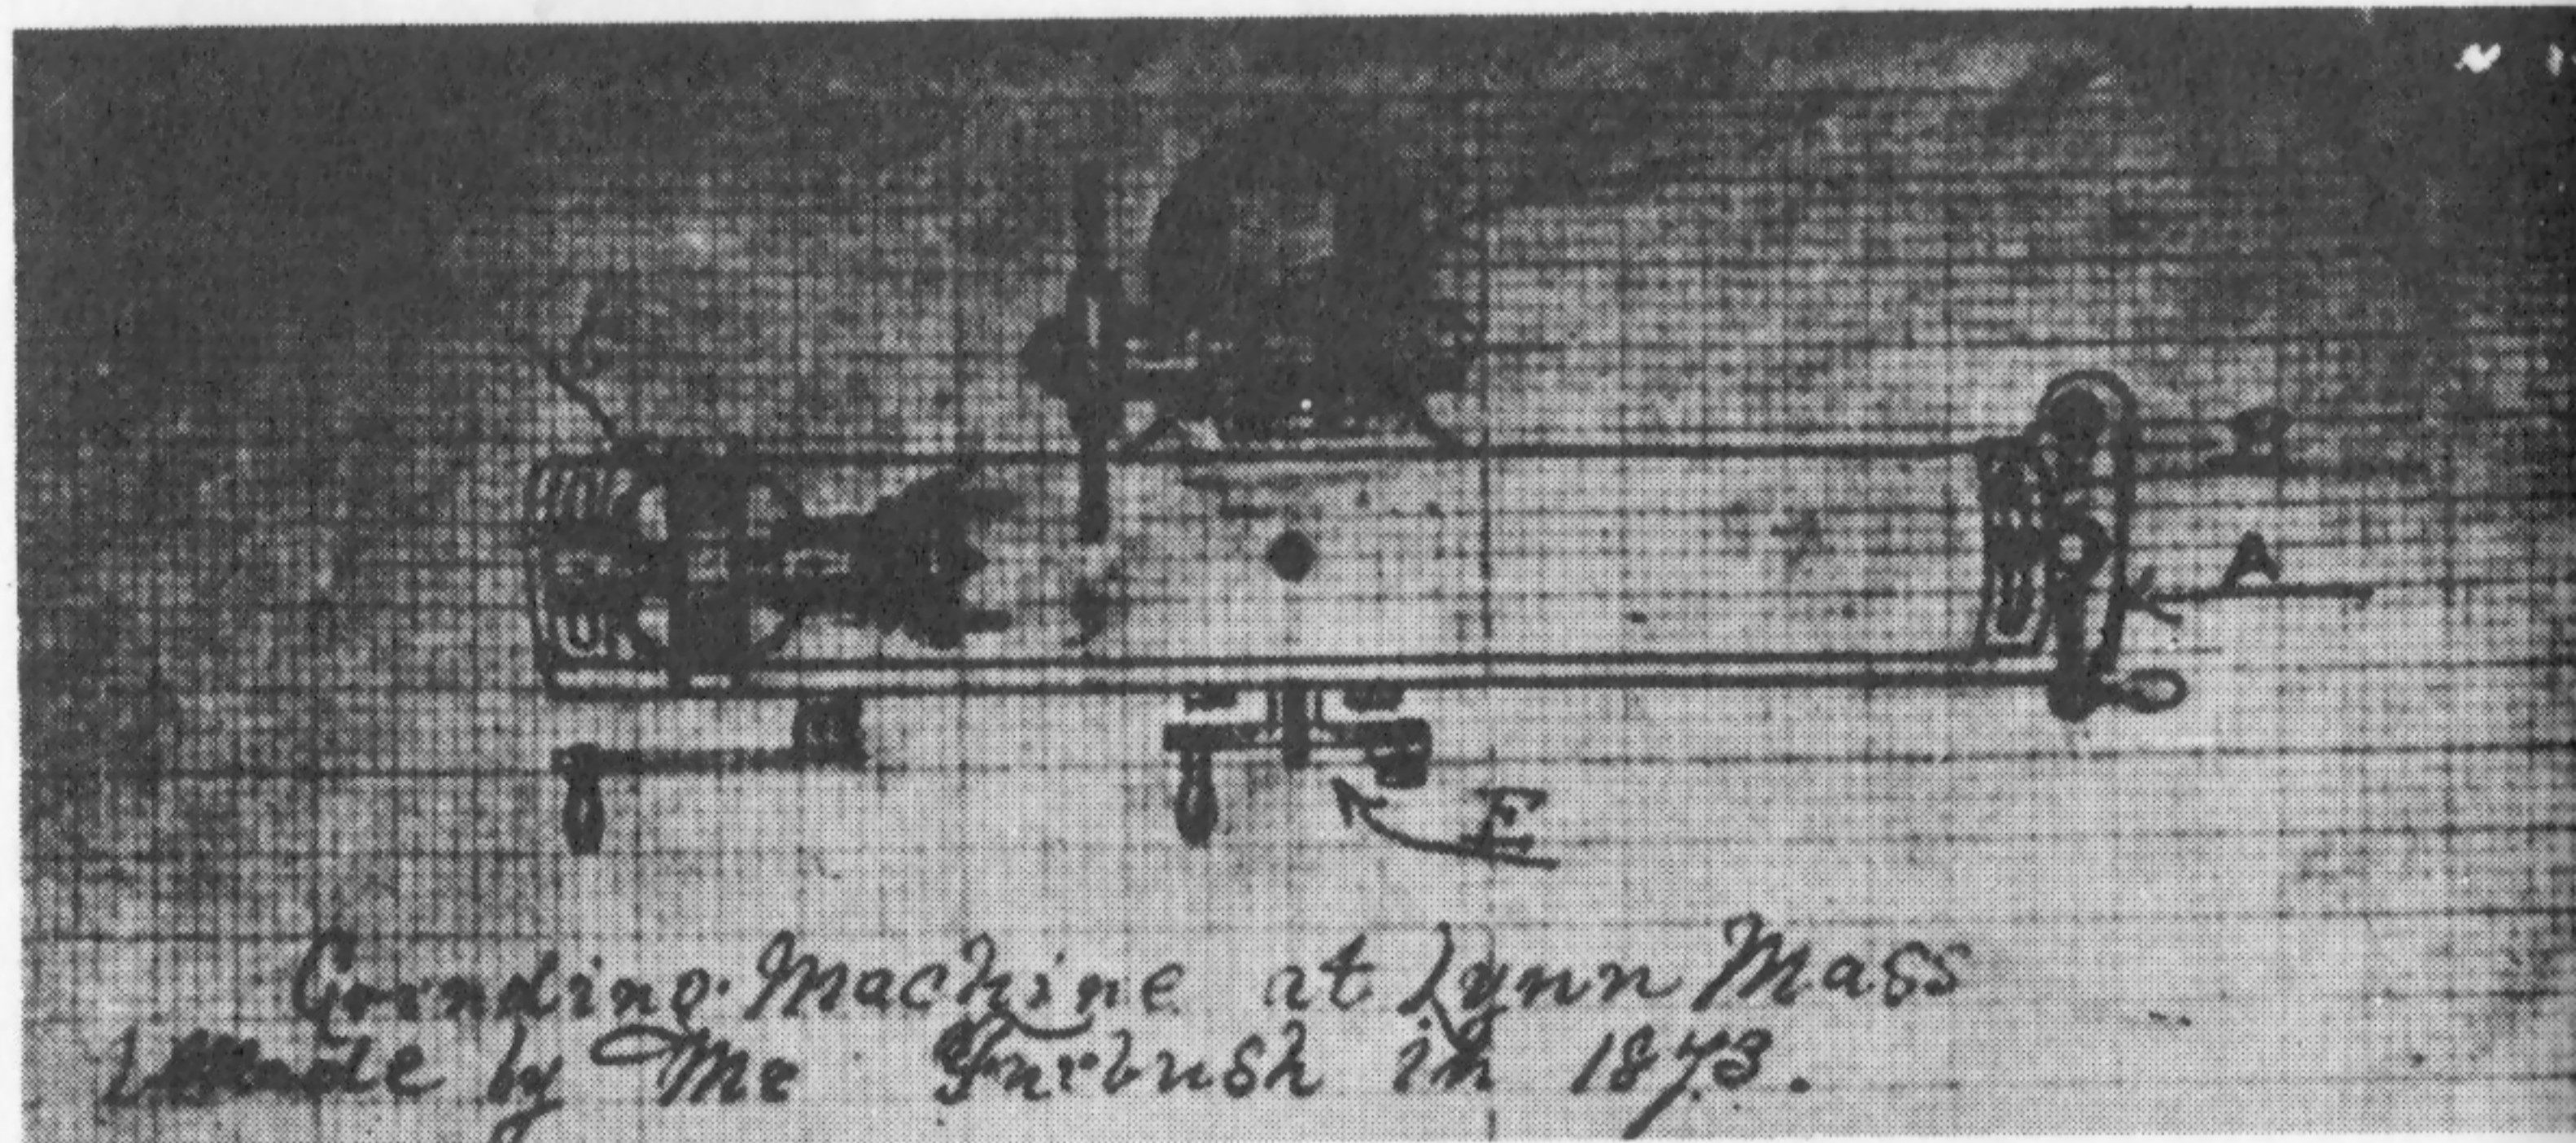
A BASIC ELEMENTS OF FURBUSH'S GRINDING MACHINE, 1873
